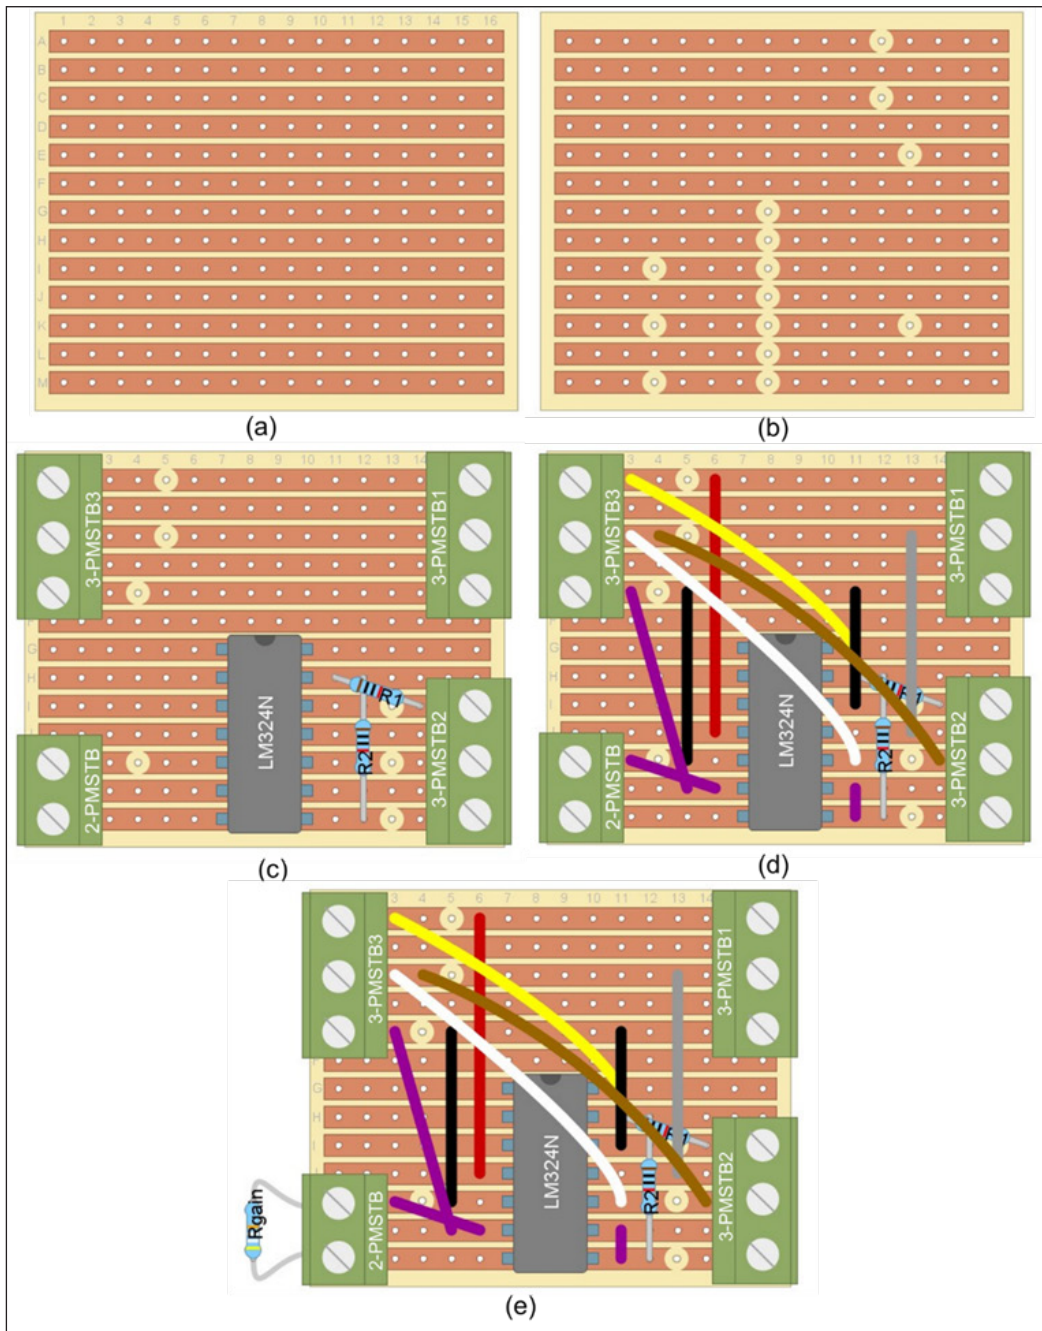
(a) Stripboard cutout dimension of 16×13 (front). (b) Breakage points (rear). (c) Placement of electronic component on stripboard (LM324N, R1 and R2, 3-PMSTB1,2,3, and 2-PMSTB2). (d) Placement of wires. (e) Placement of R_{gain}
